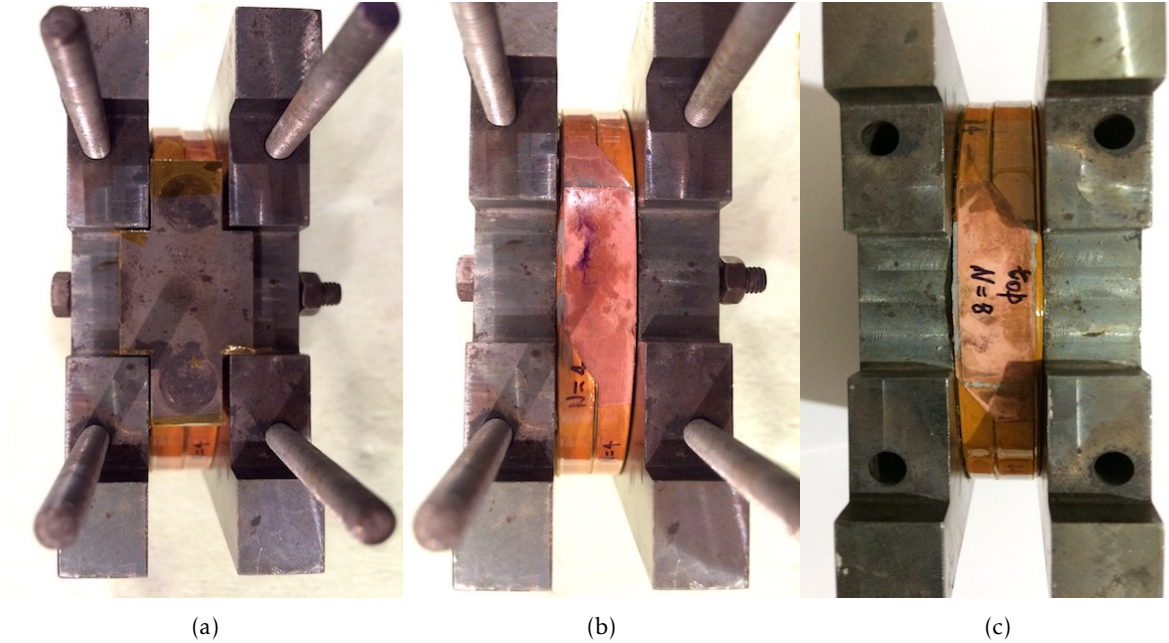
Construction of both coils through the annular mould: (a) The coil with four turns through the assembly mould, before entering the oven; (b) The coil with four turns, after exiting the oven; (c) A coil with eight turns, after exiting the oven.
